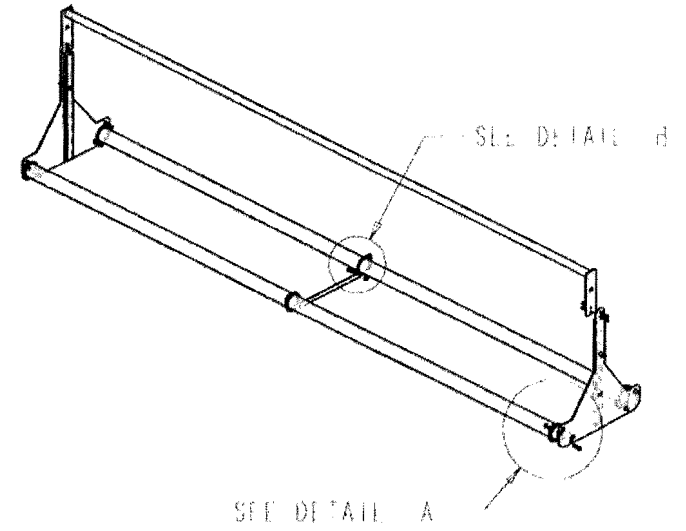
(D)—TIRE CARRIER ASSEMBLY
